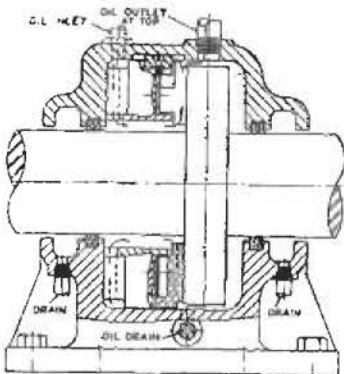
Simple horizontal mounting for single thrust bearing. Style J, B or N. Collar is integral with shaft. Forced lubrication is used.
